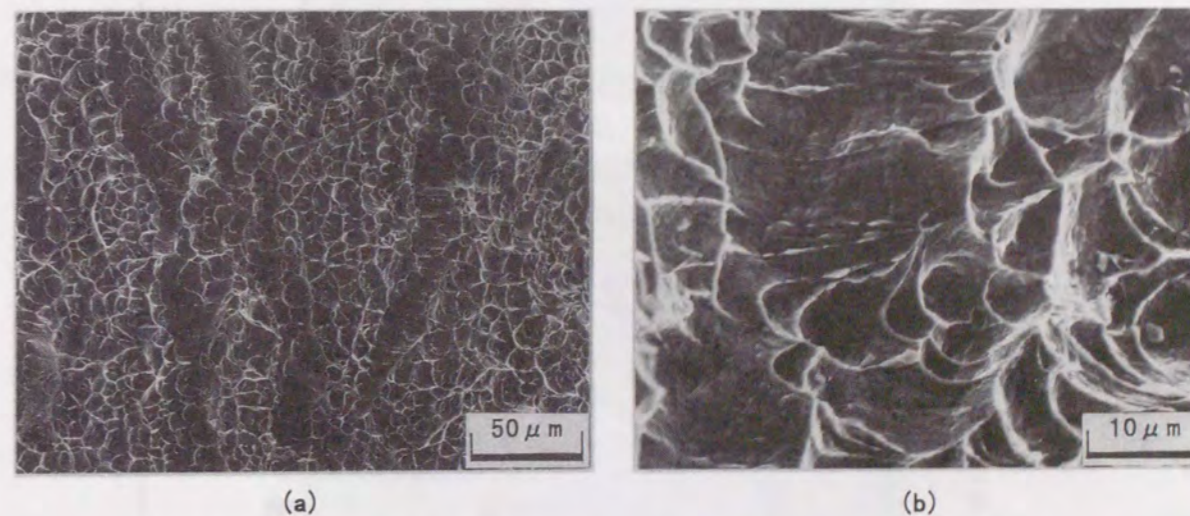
Typical micrographs of the impact fracture surfaces of ST4 weld metal (FA mode: total δ =12.0%, lacy δ =3.1%).
